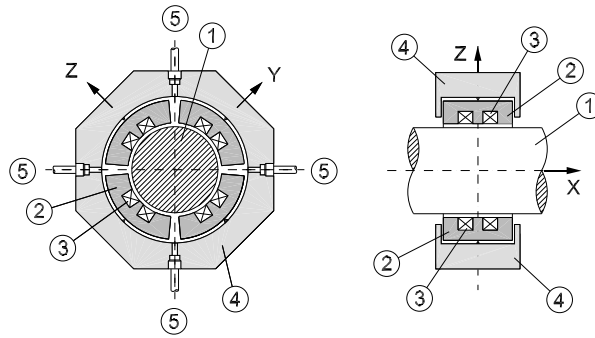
Tilting-pad hydrodynamic bearing with embedded electromagnetic actuators: 1) shaft, 2) tilting-pad, 3) electromagnetic actuator, 4) bearing casing, 5) oil inlet.
